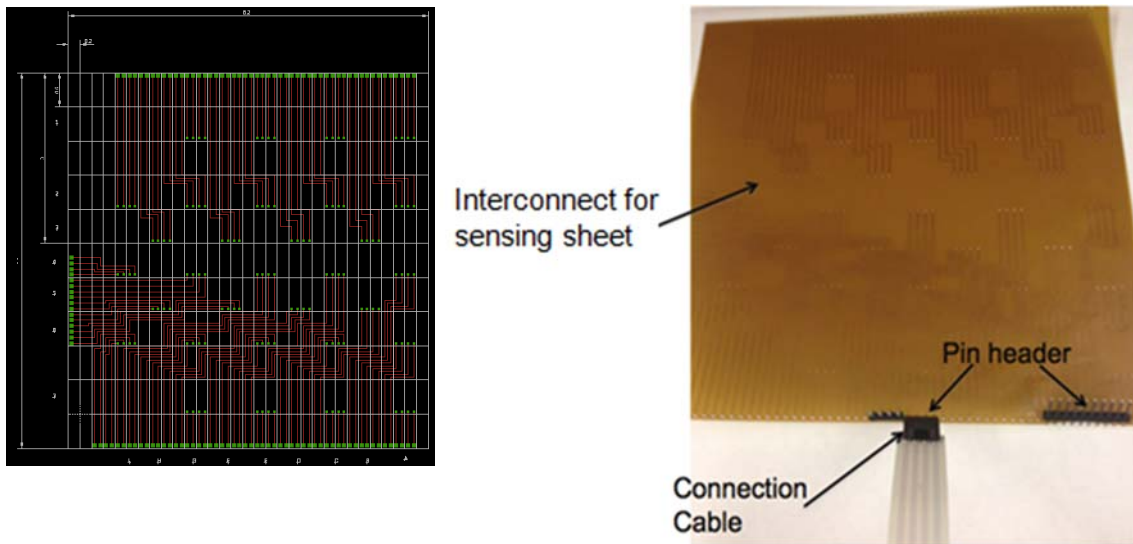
Left: Example of PCB design of sensing sheet interconnect (for strain sensing sheet prototype shown in Figure 2 left). Right: Interconnect manufactured based on the PCB design.
